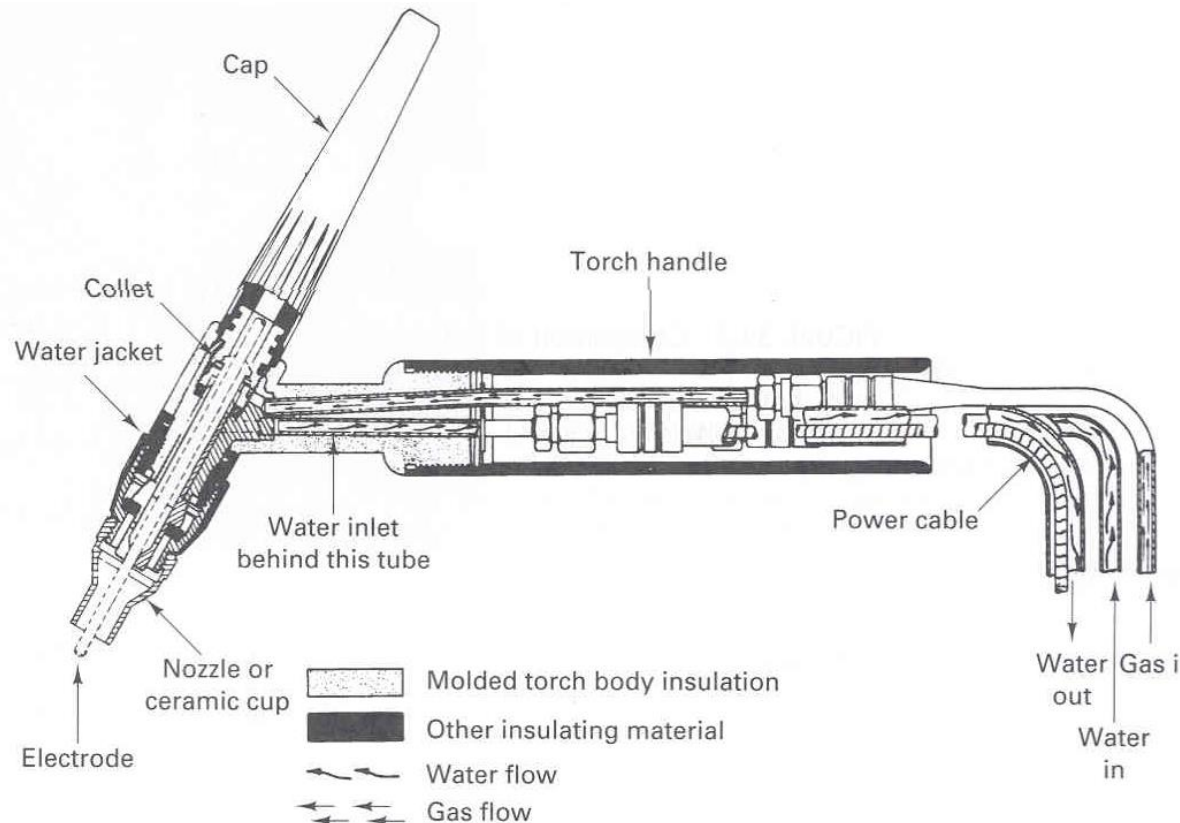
Welding torch used in nonconsumable-electrode, gas tungsten arc welding (GTAW), showing feed lines for power, cooling water, and inert gas flow. (Courtesy of Linde Division, Union Carbide Corporation.)
